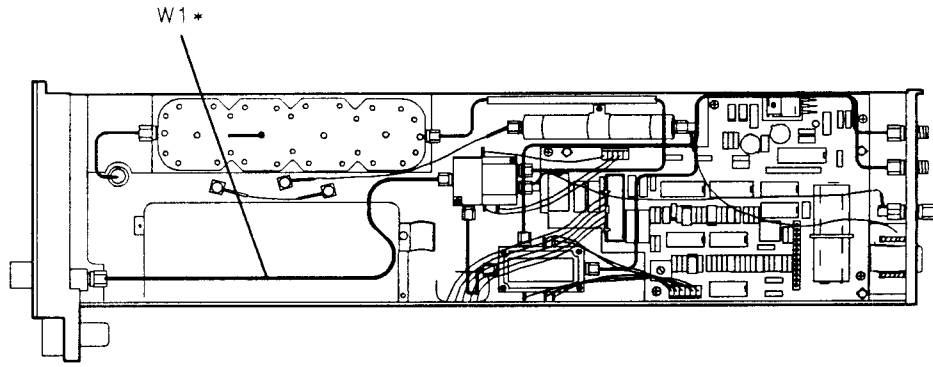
Overall Module Parts Identification, HP70905A/6A Right-Side View (1 of 2)
